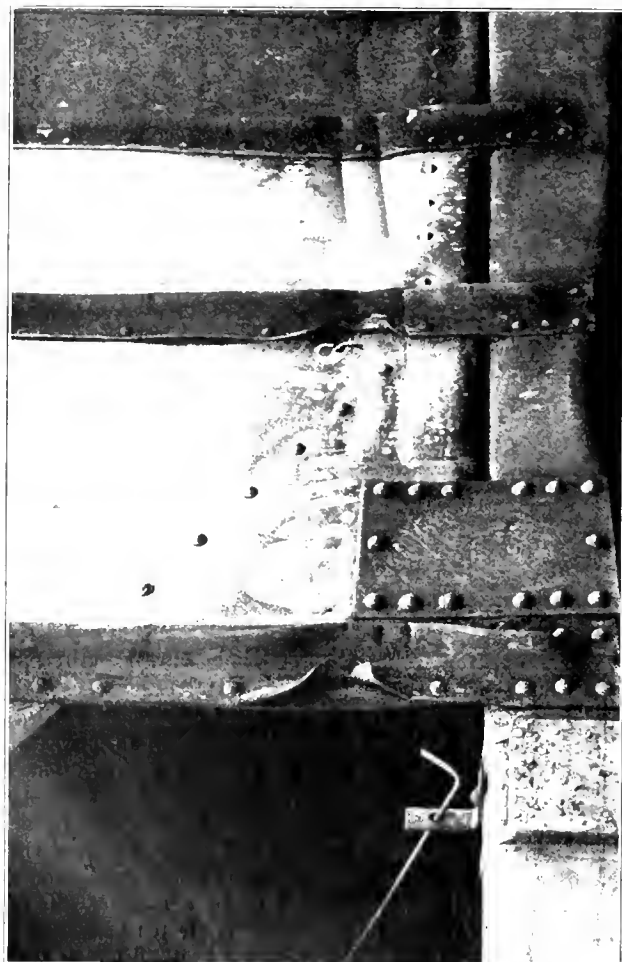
UPRIGHTS AND UPPER PART OF END SILL PLATE DAMAGED.
